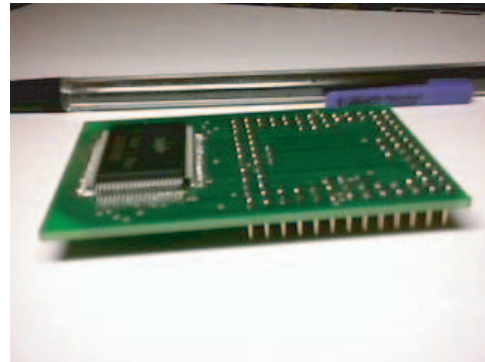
Adaptor Board (4.16 square inches) This custom PCB has a quad flat pack (QFP) packaged FPAA IC on one side and pins on the other side. The pins plug into the 100 pin ZIF socket on the programming and control board.
